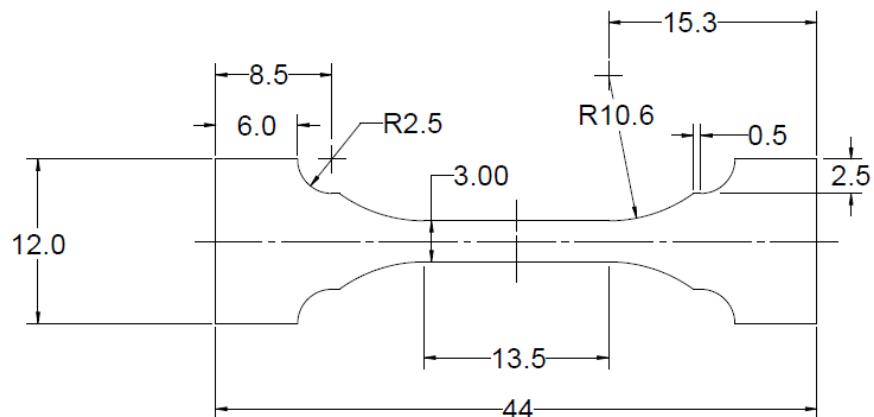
Drawing of milli-scale tensile specimen (units in mm)
